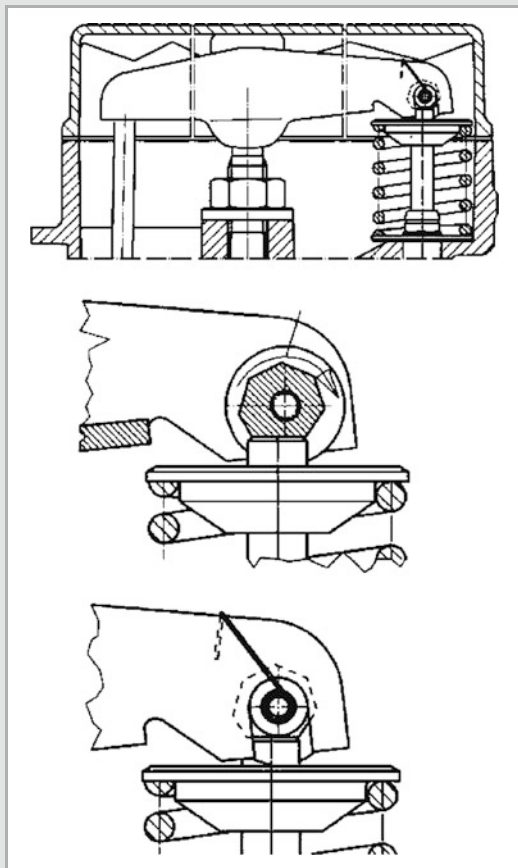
Mechanical valve clearance compensation with an automatic eccentric multistep catch (torsion spring driven)
